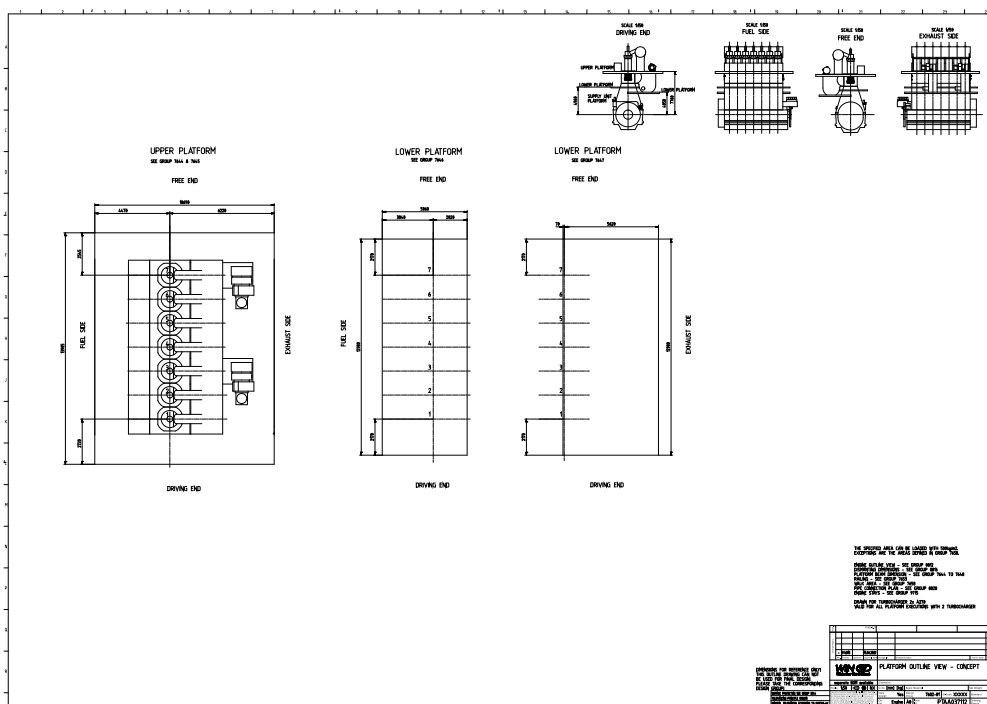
Example drawing of a new Platform outline view – Concept (DG 7602-01) for a 7X82-2.0 engine
